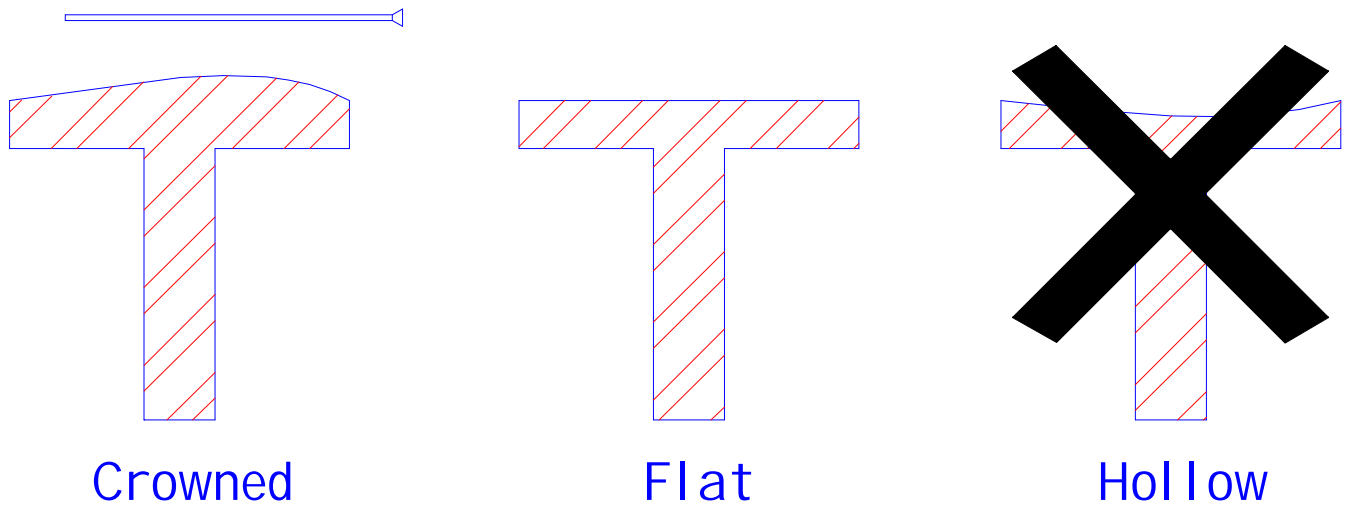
Wheel crown. Avoid hollow or exactly flat wheels.
